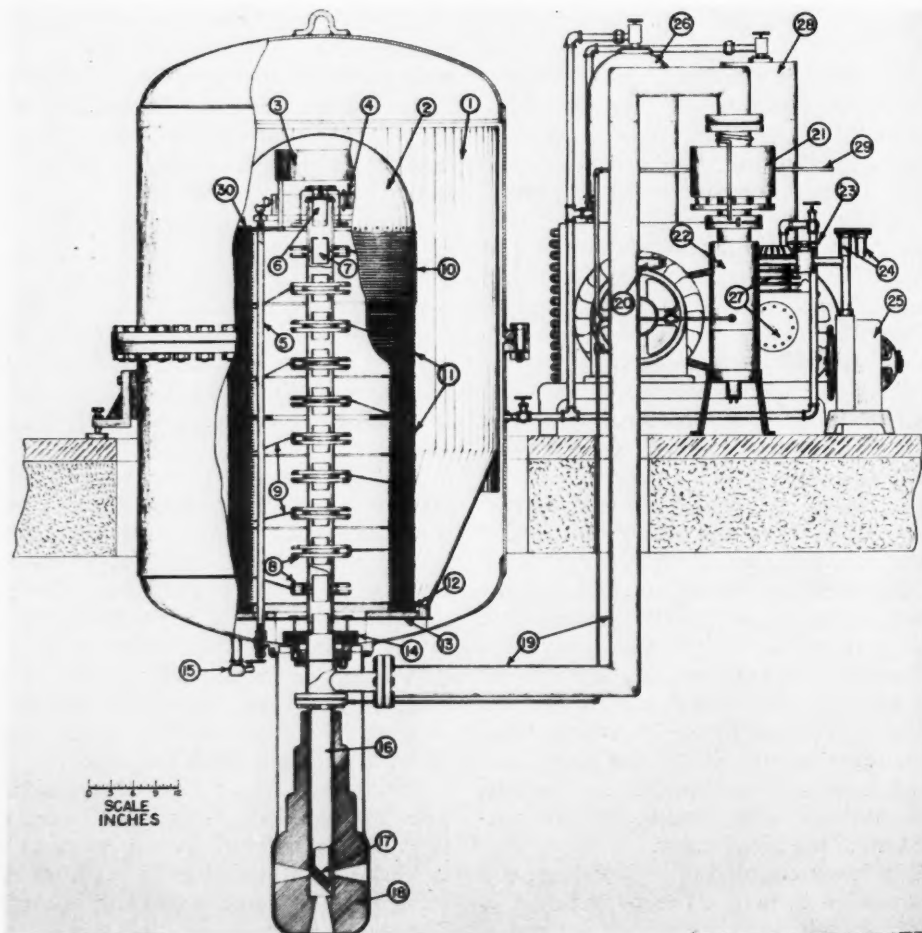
Drawing of million-volt x-ray outfit: (1) Laminated steel shell; (2) slotted brass shield; (3) lead shield; (4) variable reactor; (5) insulating shaft; (6) cathode assembly; (7) first intermediate electrode; (8) shields around the seals; (9) tapleads; (10) secondary coils with copper tube shields; (11) secondary coils; (12) primary winding; (13) laminated bottom; (14) focussing coil; (15) filament control motor; (16) extension chamber with water jacket; (17) target; (18) lead shield; (19) vacuum line; (20) ionization gauge; (21) charcoal trap; (22) oil-diffusion pump; (23) vacuum shut-off valve; (24) Pirani-Hale gauge; (25) rough vacuum pumps; (26) Freon supply tank; (27) Freon compressor; (28) Freon storage tank; (29) cooling water inlet, drain omitted; (30) end-turn filament coil.
